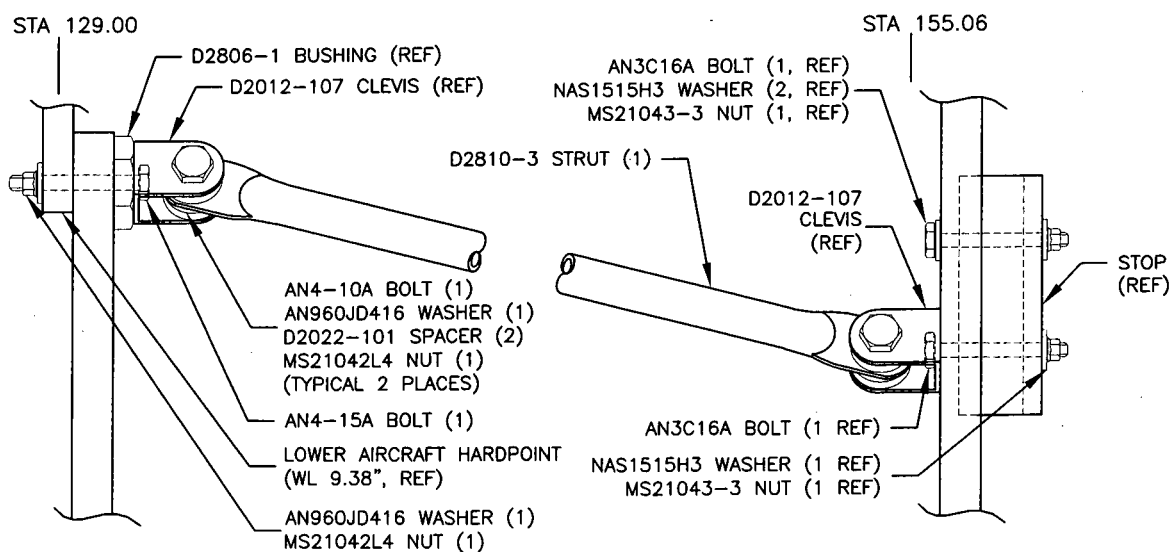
Strut Detail for D412-630-011/-012 Heli-Access-Step™ Installation
